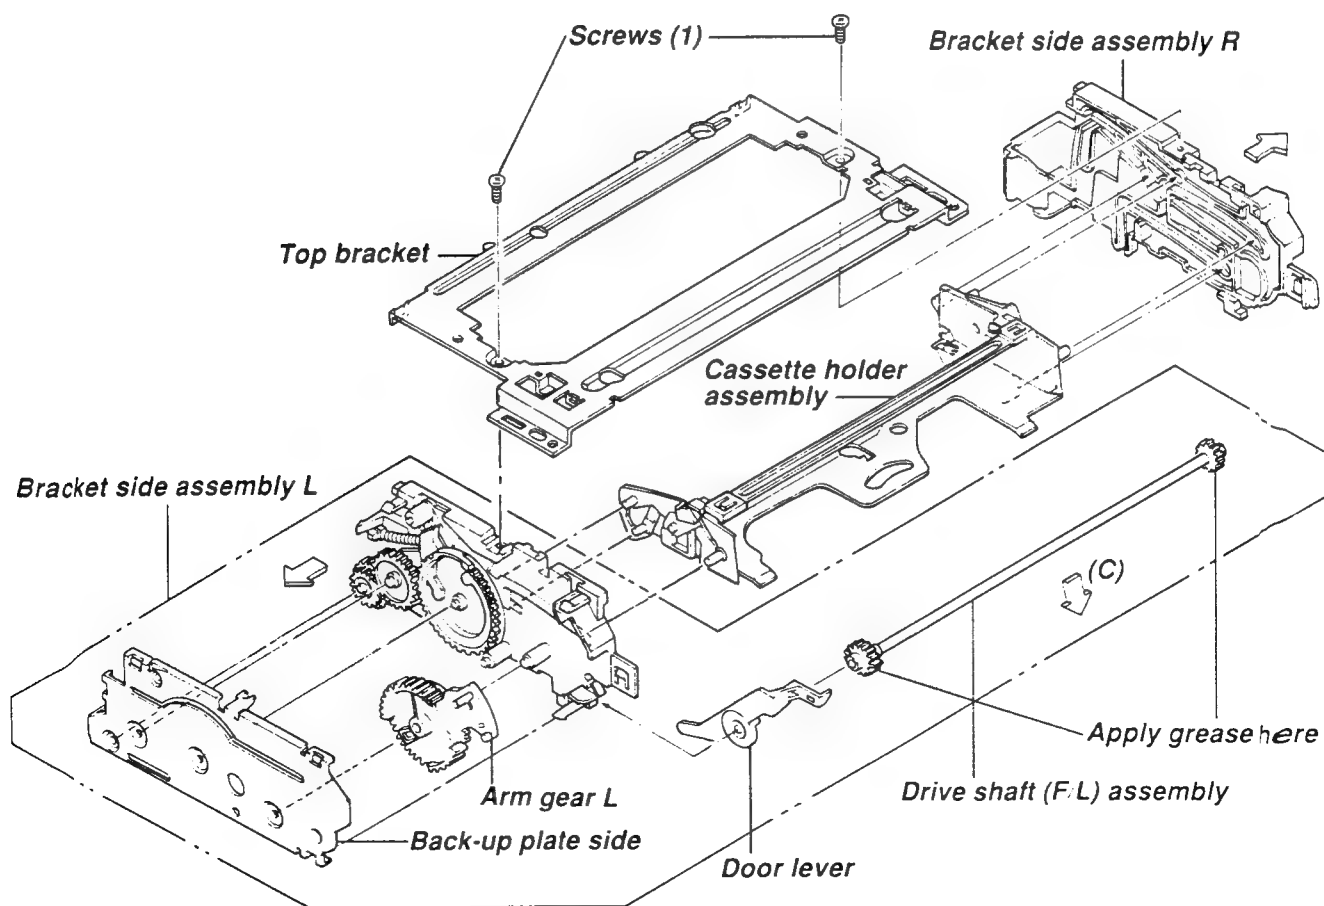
Drive shaft (F/L) assembly replacement
